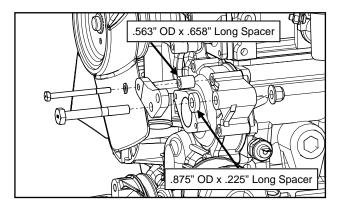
(Double Groove Pulley & OEM Alternator)
